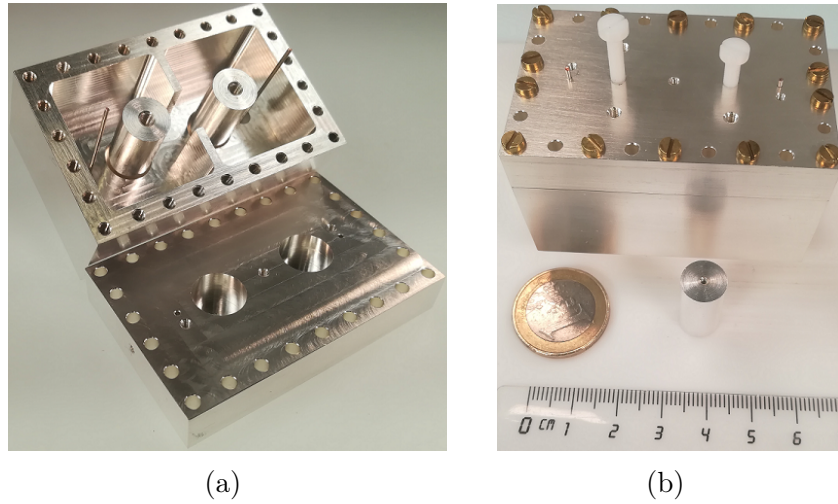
The fabricated two-pole inset bandpass filter. (a) Disassembled and (b) assembled.
